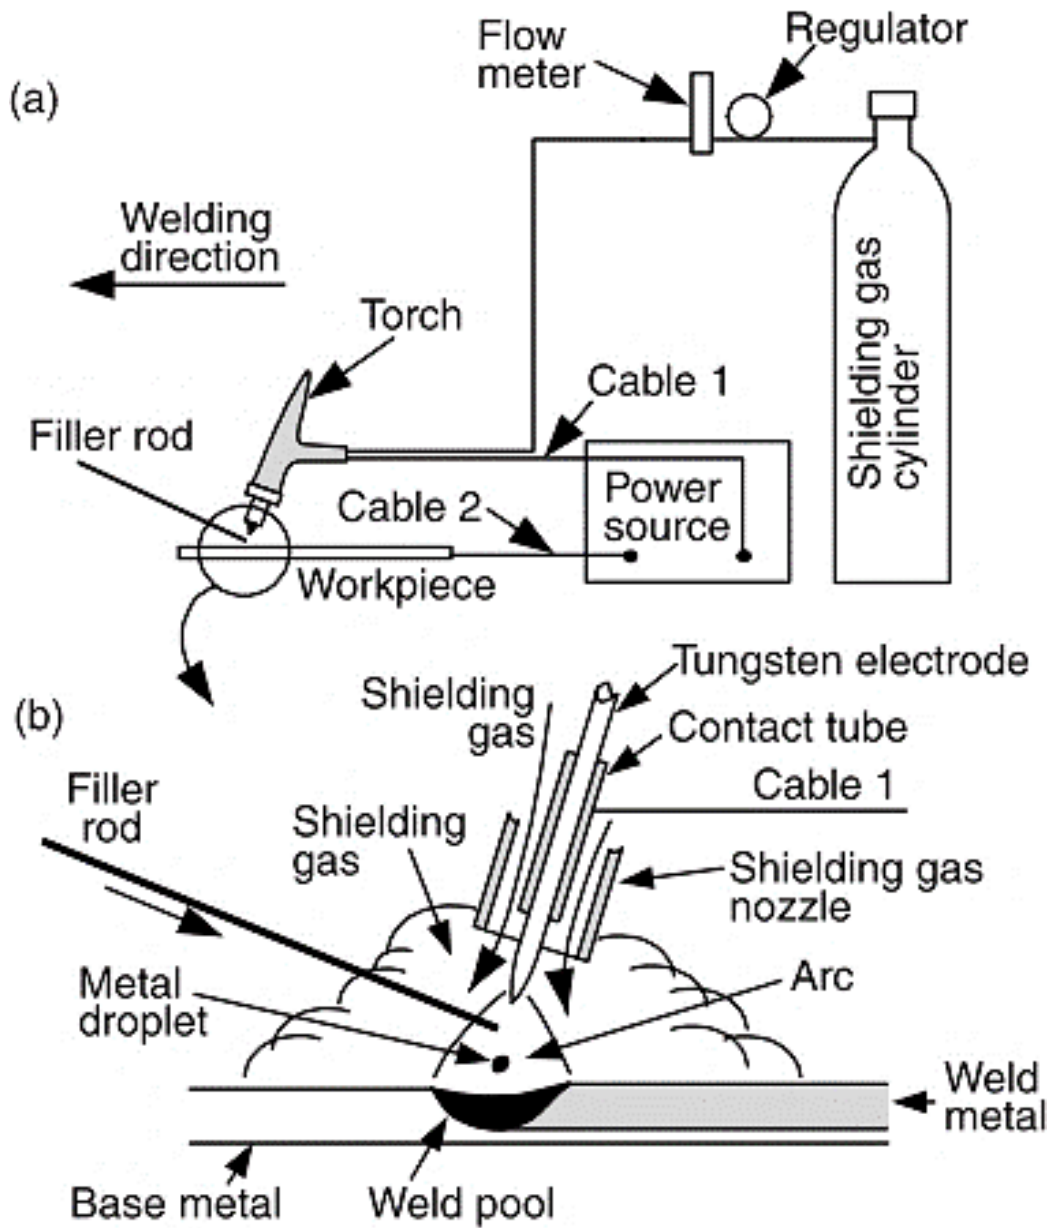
GTAW process: a. Overall process, and b. Welding area (magnified) [60].
